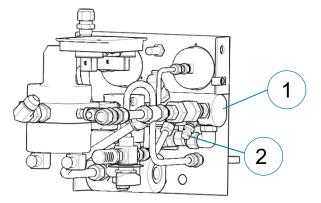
Rear of box style FMM. Bleed valve (2) is typically located in a manifold (1).
